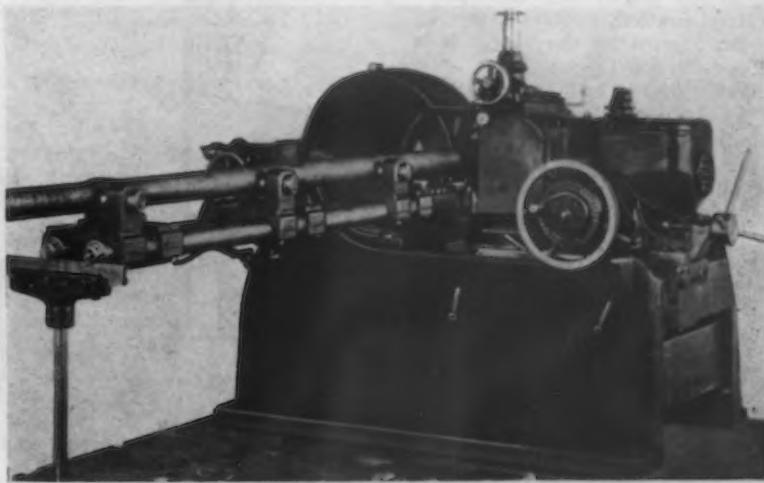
The No. 3 Centerless Grinder for Large Bars, Is Equipped With a 24-In. Diameter, 6-In. Face Grinding Wheel. A 3½-in. bar is mounted in the fixture shown
